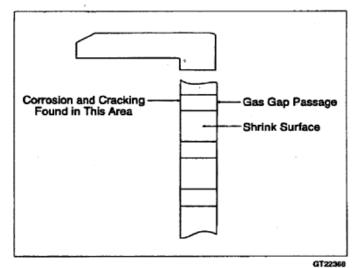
Spindle-mounted retaining ring; typical indications found on inside diameter
